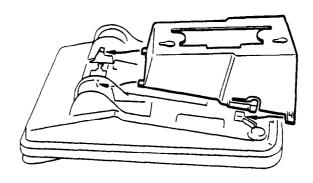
Mounting the Multiline Terminal to the WMU-W (BK) Unit
